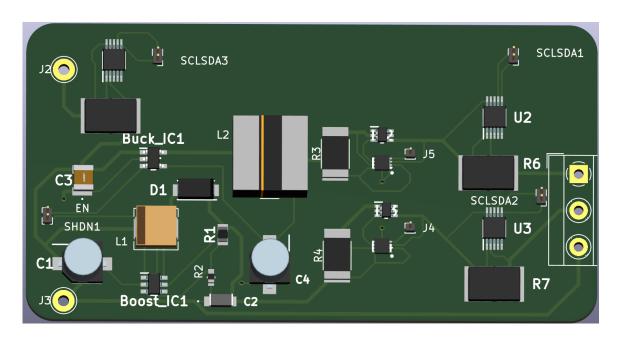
Buck and Boost circuit PCB - 3D Model
